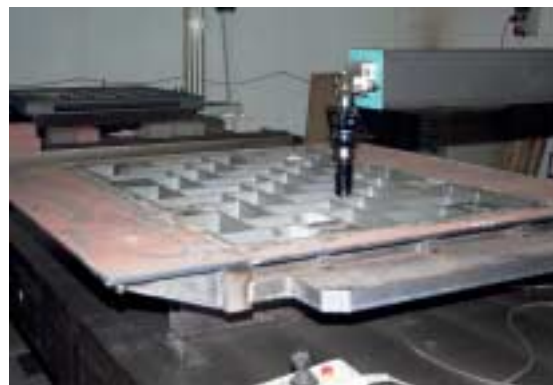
Exact measuring of the insert to create the tamper shoe.
